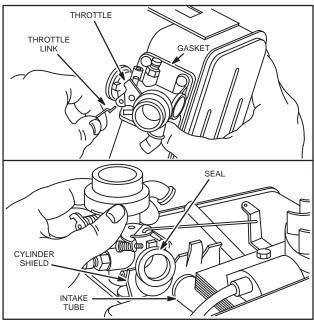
INSTALLING CARBURETOR MODEL SERIES 100900, 130900, 131900
